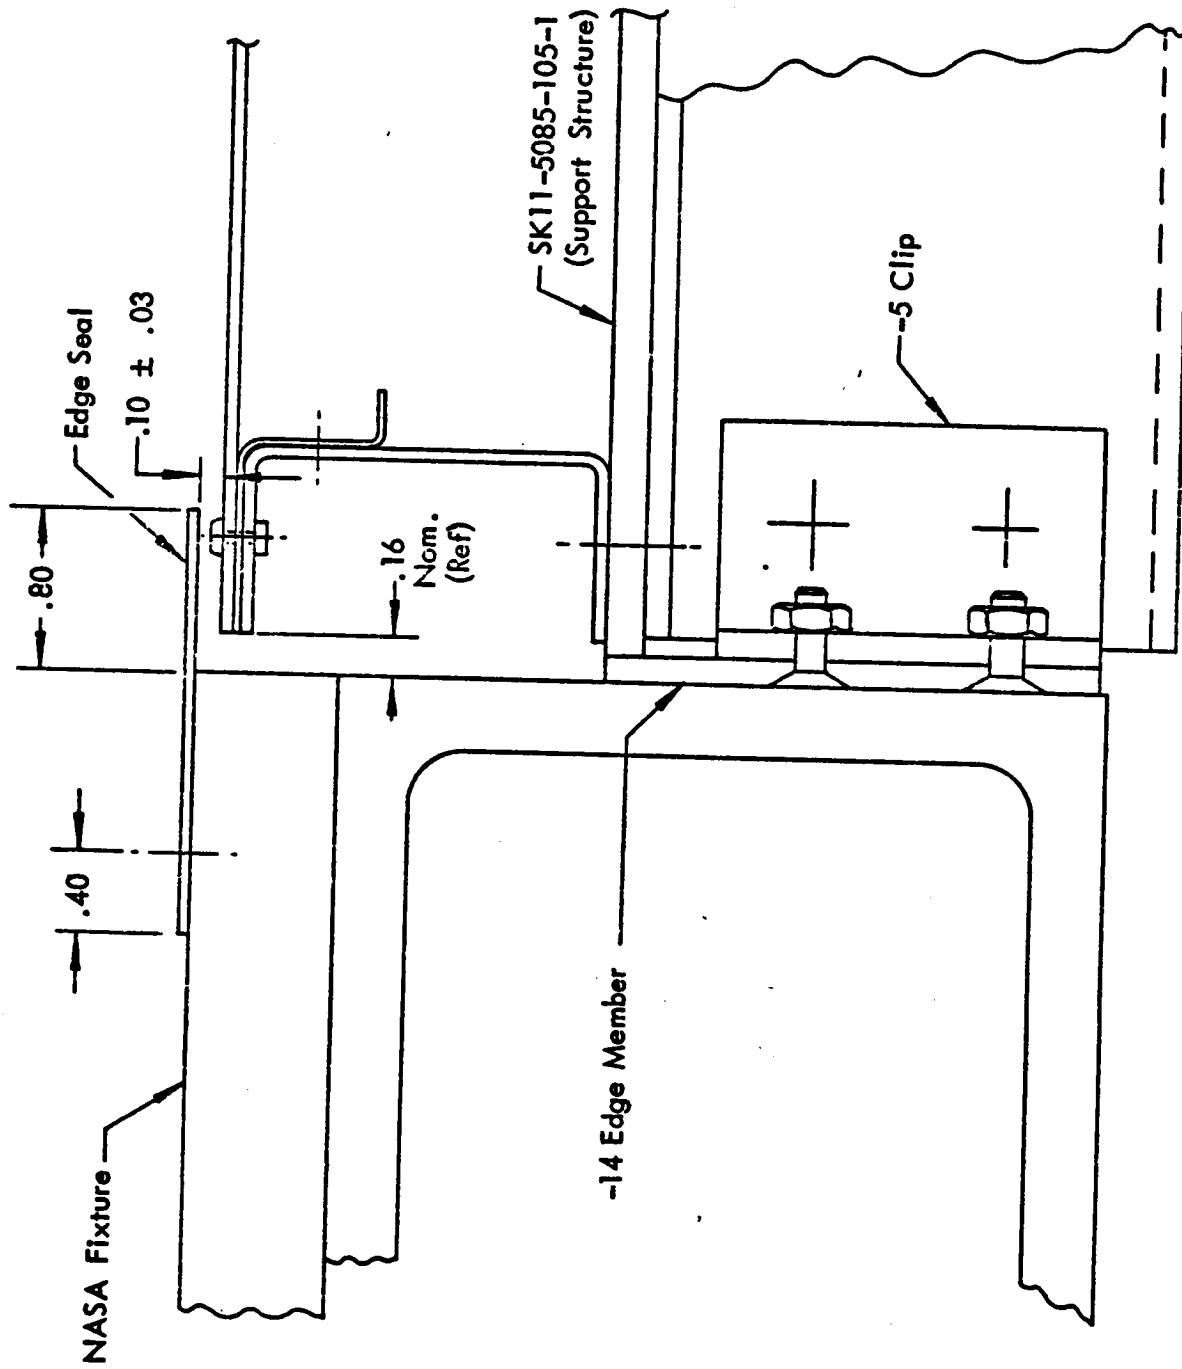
SECTION - SONIC FATIGUE TEST ARRANGEMENT
